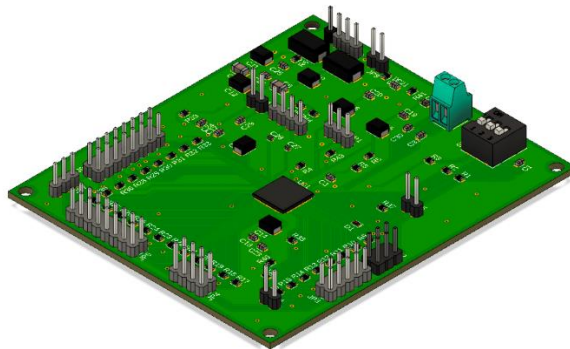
DS92LV2422 De-serializer PCB 3D rendering
